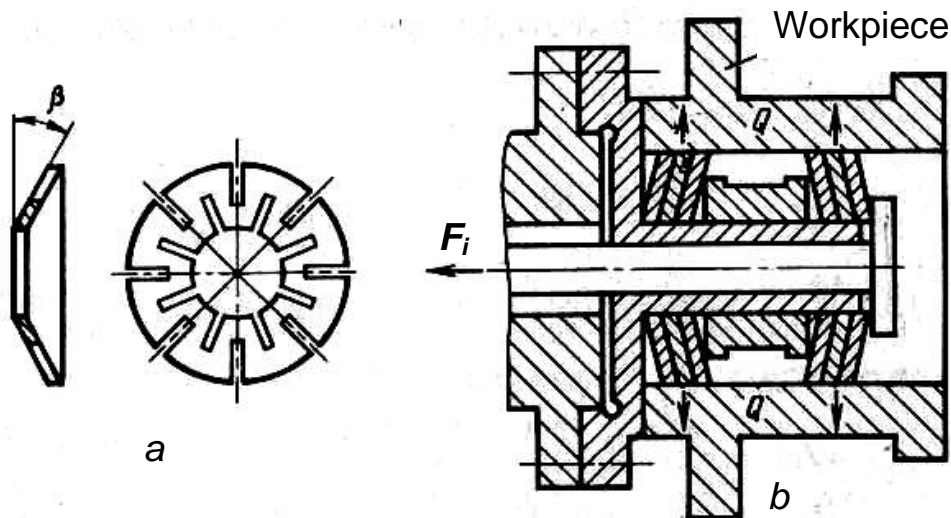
Clamping mechanisms with disk springs: a – spring; b – mounting of a workpiece on mandrel as a set of disk springs
